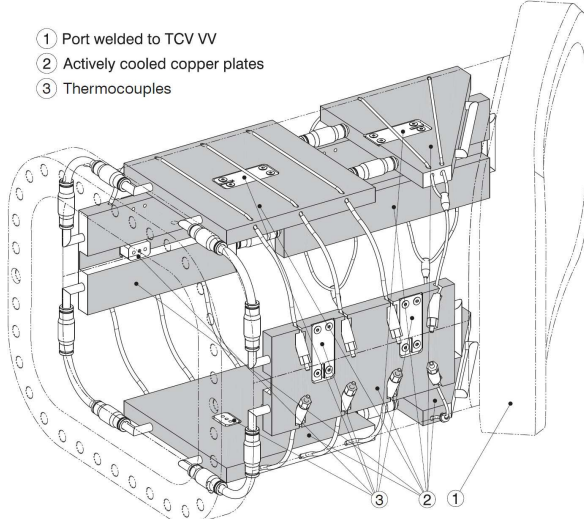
Port welded to TCV VV equipped with actively cooled copper plates.
